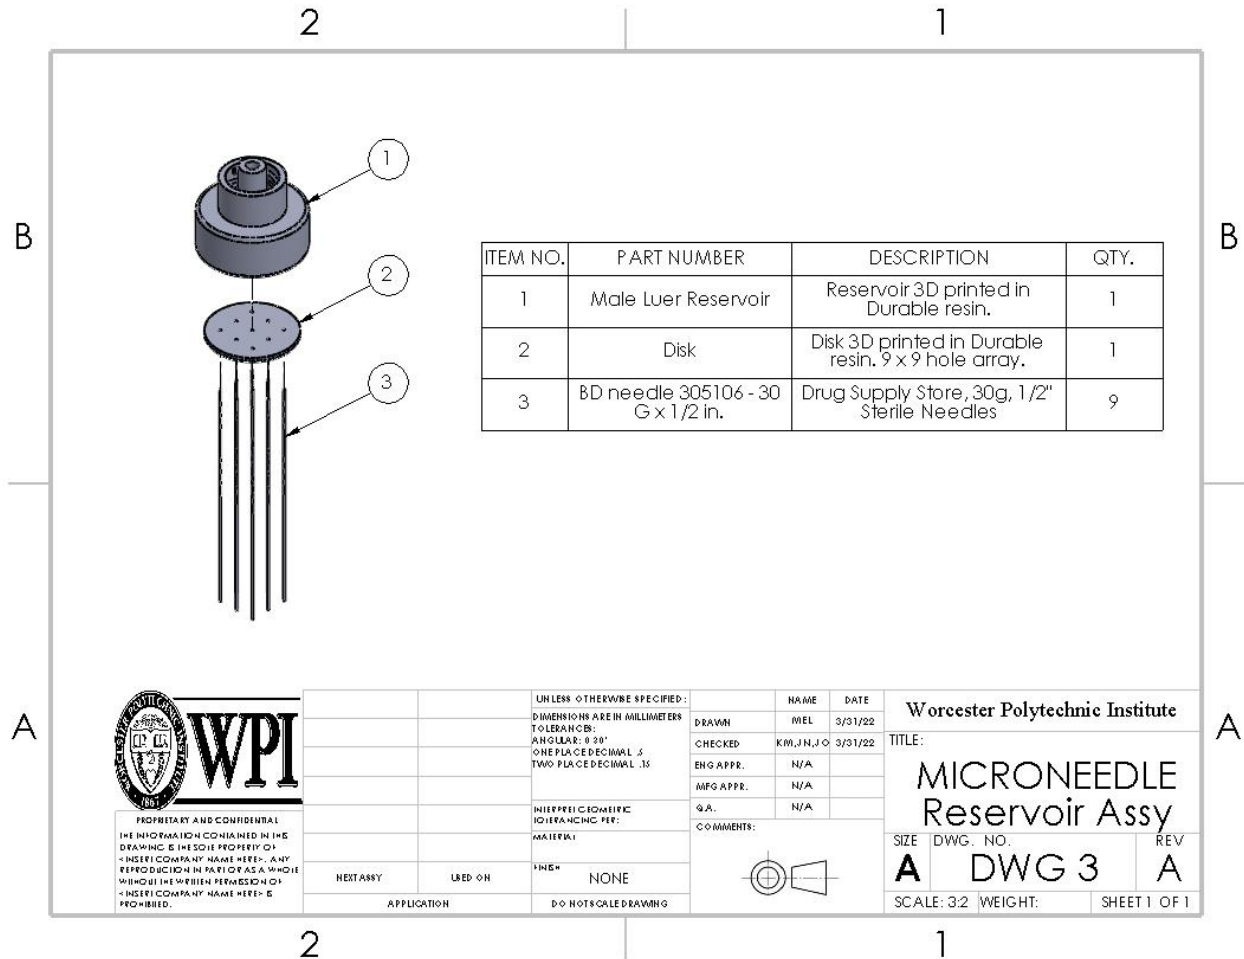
CAD drawing of exploded view of the reservoir assembly.
